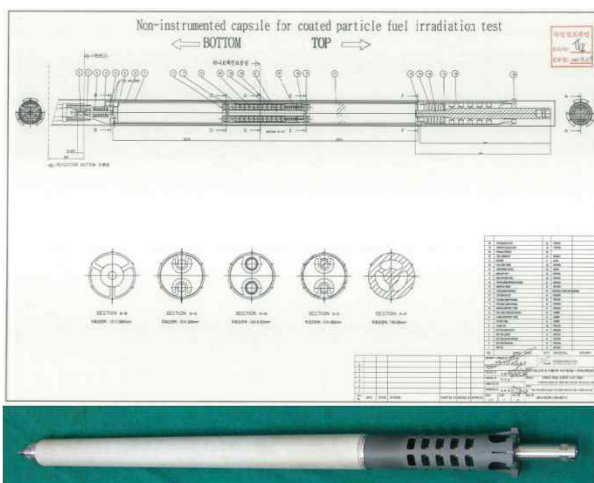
Assembly drawing accepted and the device to irradiate coated particle fuel at HANARO [3].
